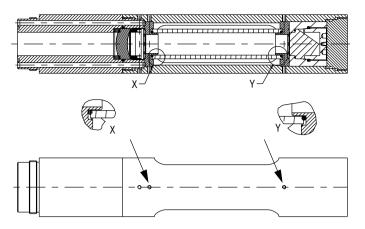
Cleaning/replacing the sinter filter (for NP probes with filter, B probes and W wafers). Arrows indicate the sunk-in screws to uninstall the filter.
